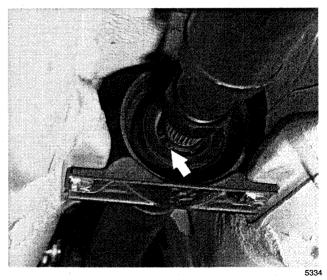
Center bearing circlip (arrow) to be removed. Driveshaft shown installed.
